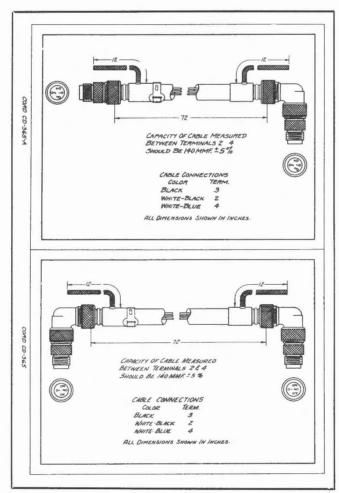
Cord CD-365 and CD-365-A-Outline Drawing
